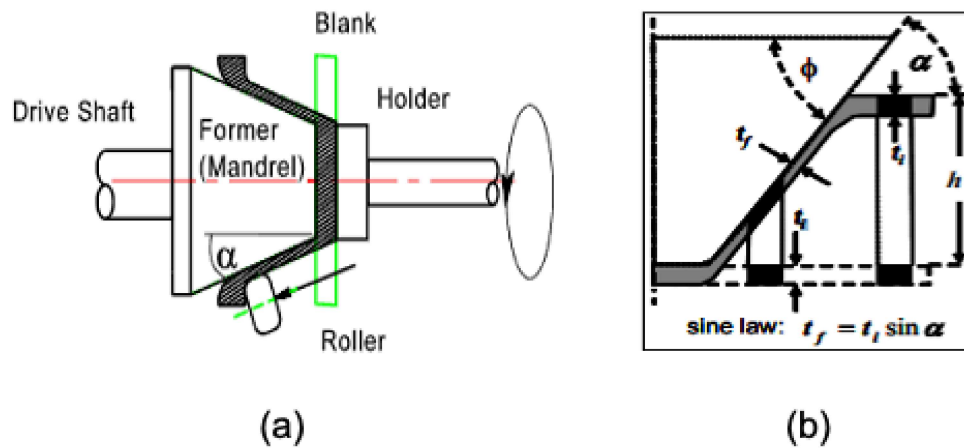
(a) Shear forming process (b) Sine law for thickness prediction [16].
